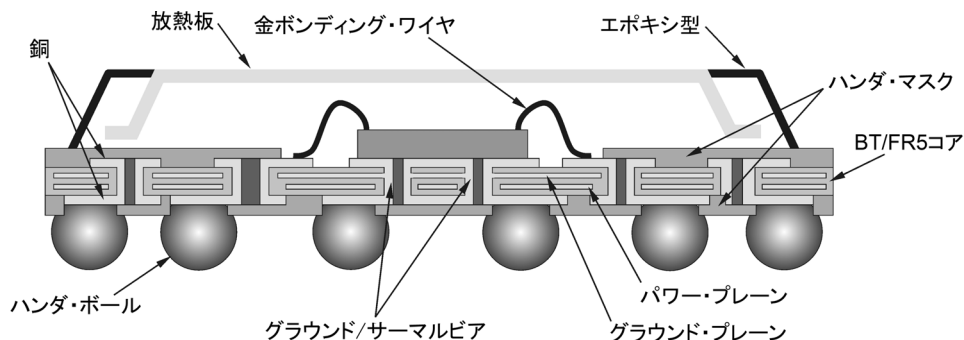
Cross-Sectional View of 4 Layer TE-PBGA
